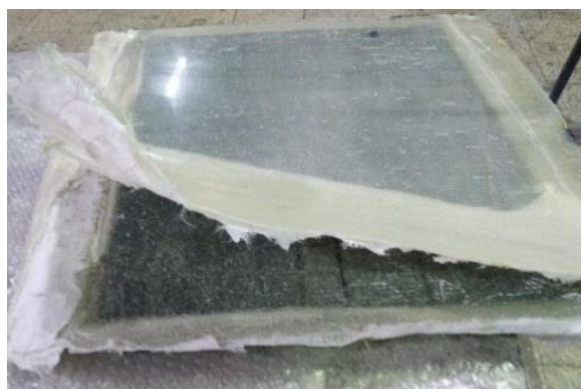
Separating the peel-ply from the fabricated sandwich panel
